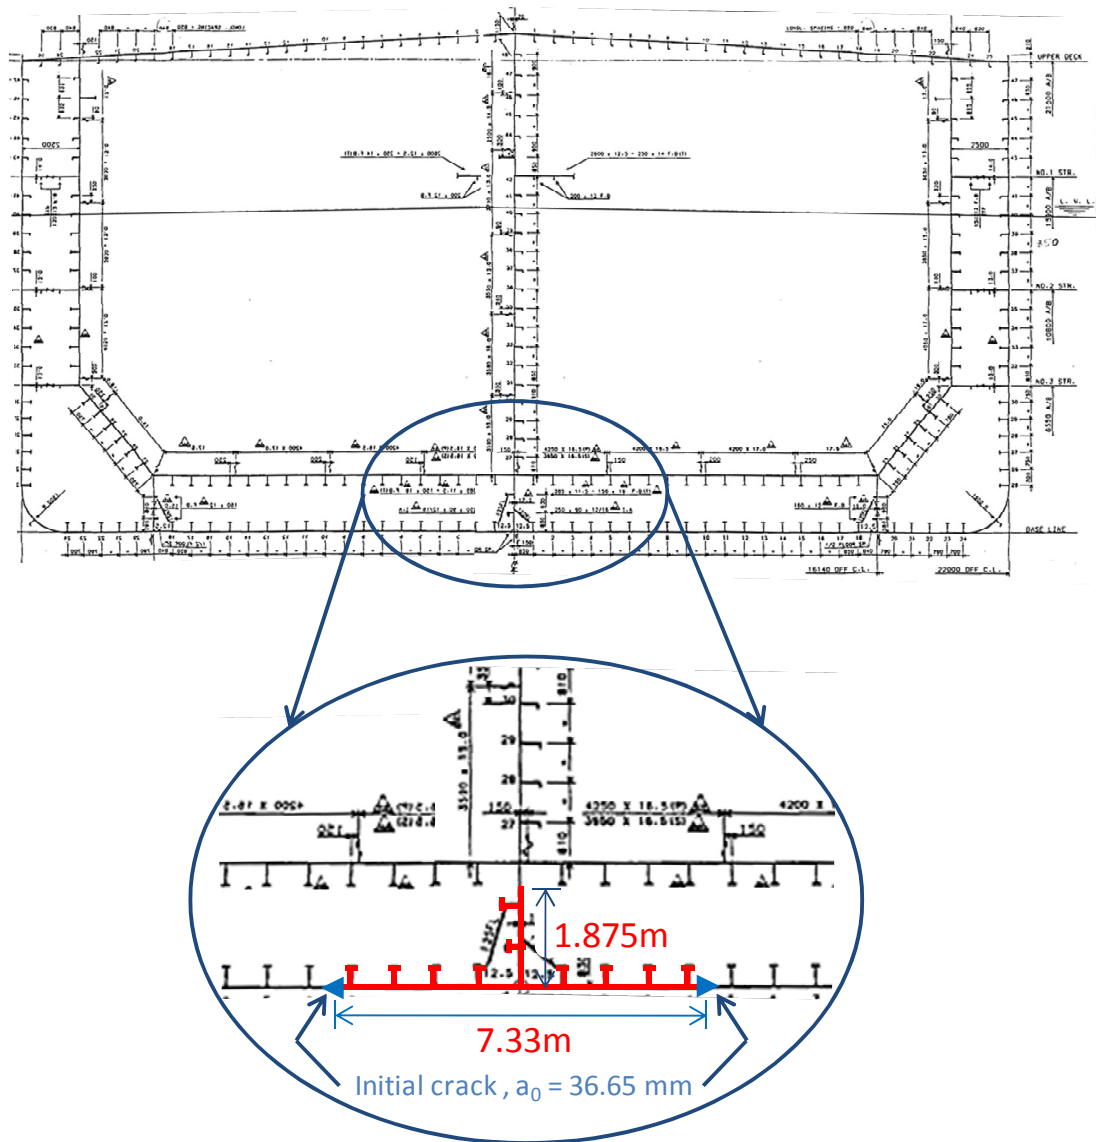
Extent and location of grounding damage of the Aframax tanker in cross-section
